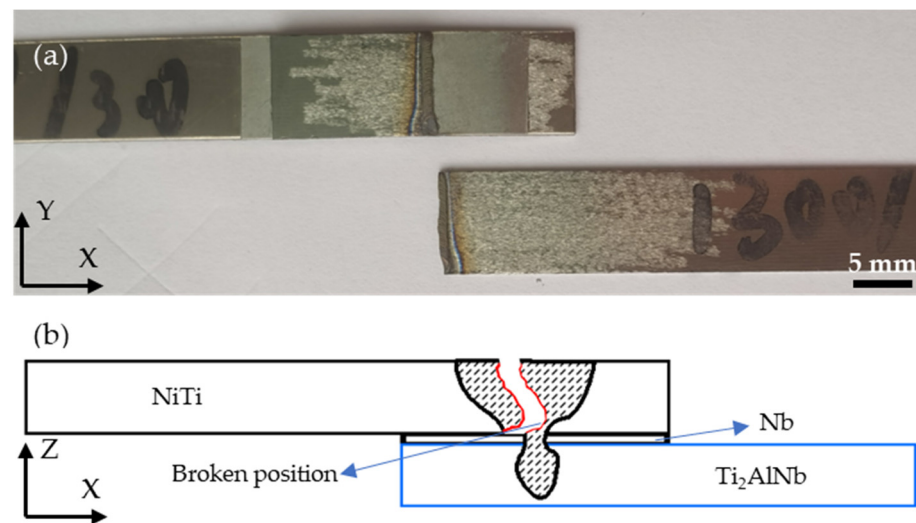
Fracture mode II: (a) Tensile fracture specimen; (b) Schematic diagram of fracture (The red line indicates the fracture surface).
